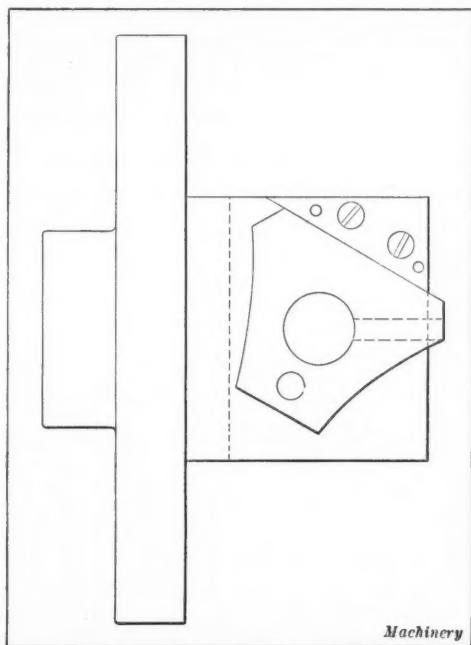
Holding Gage for boring and lapping Holes in Ends
